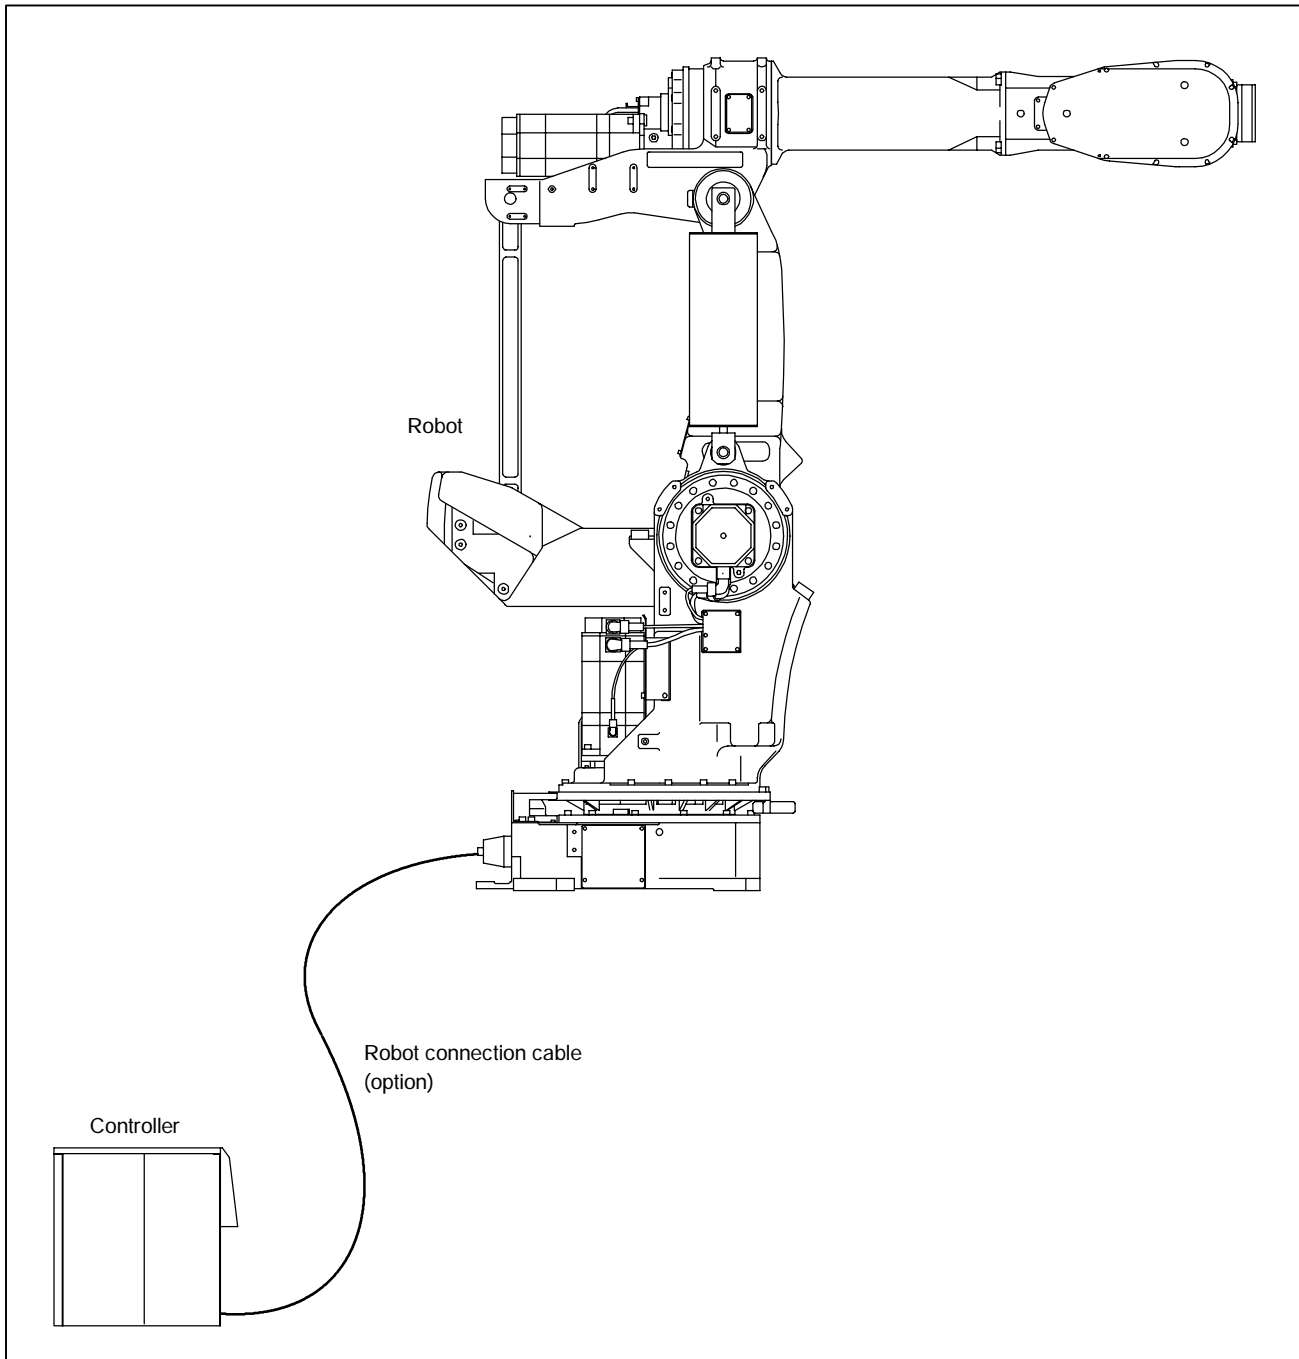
(c) Connecting Cables at Installation (B cabinet)
